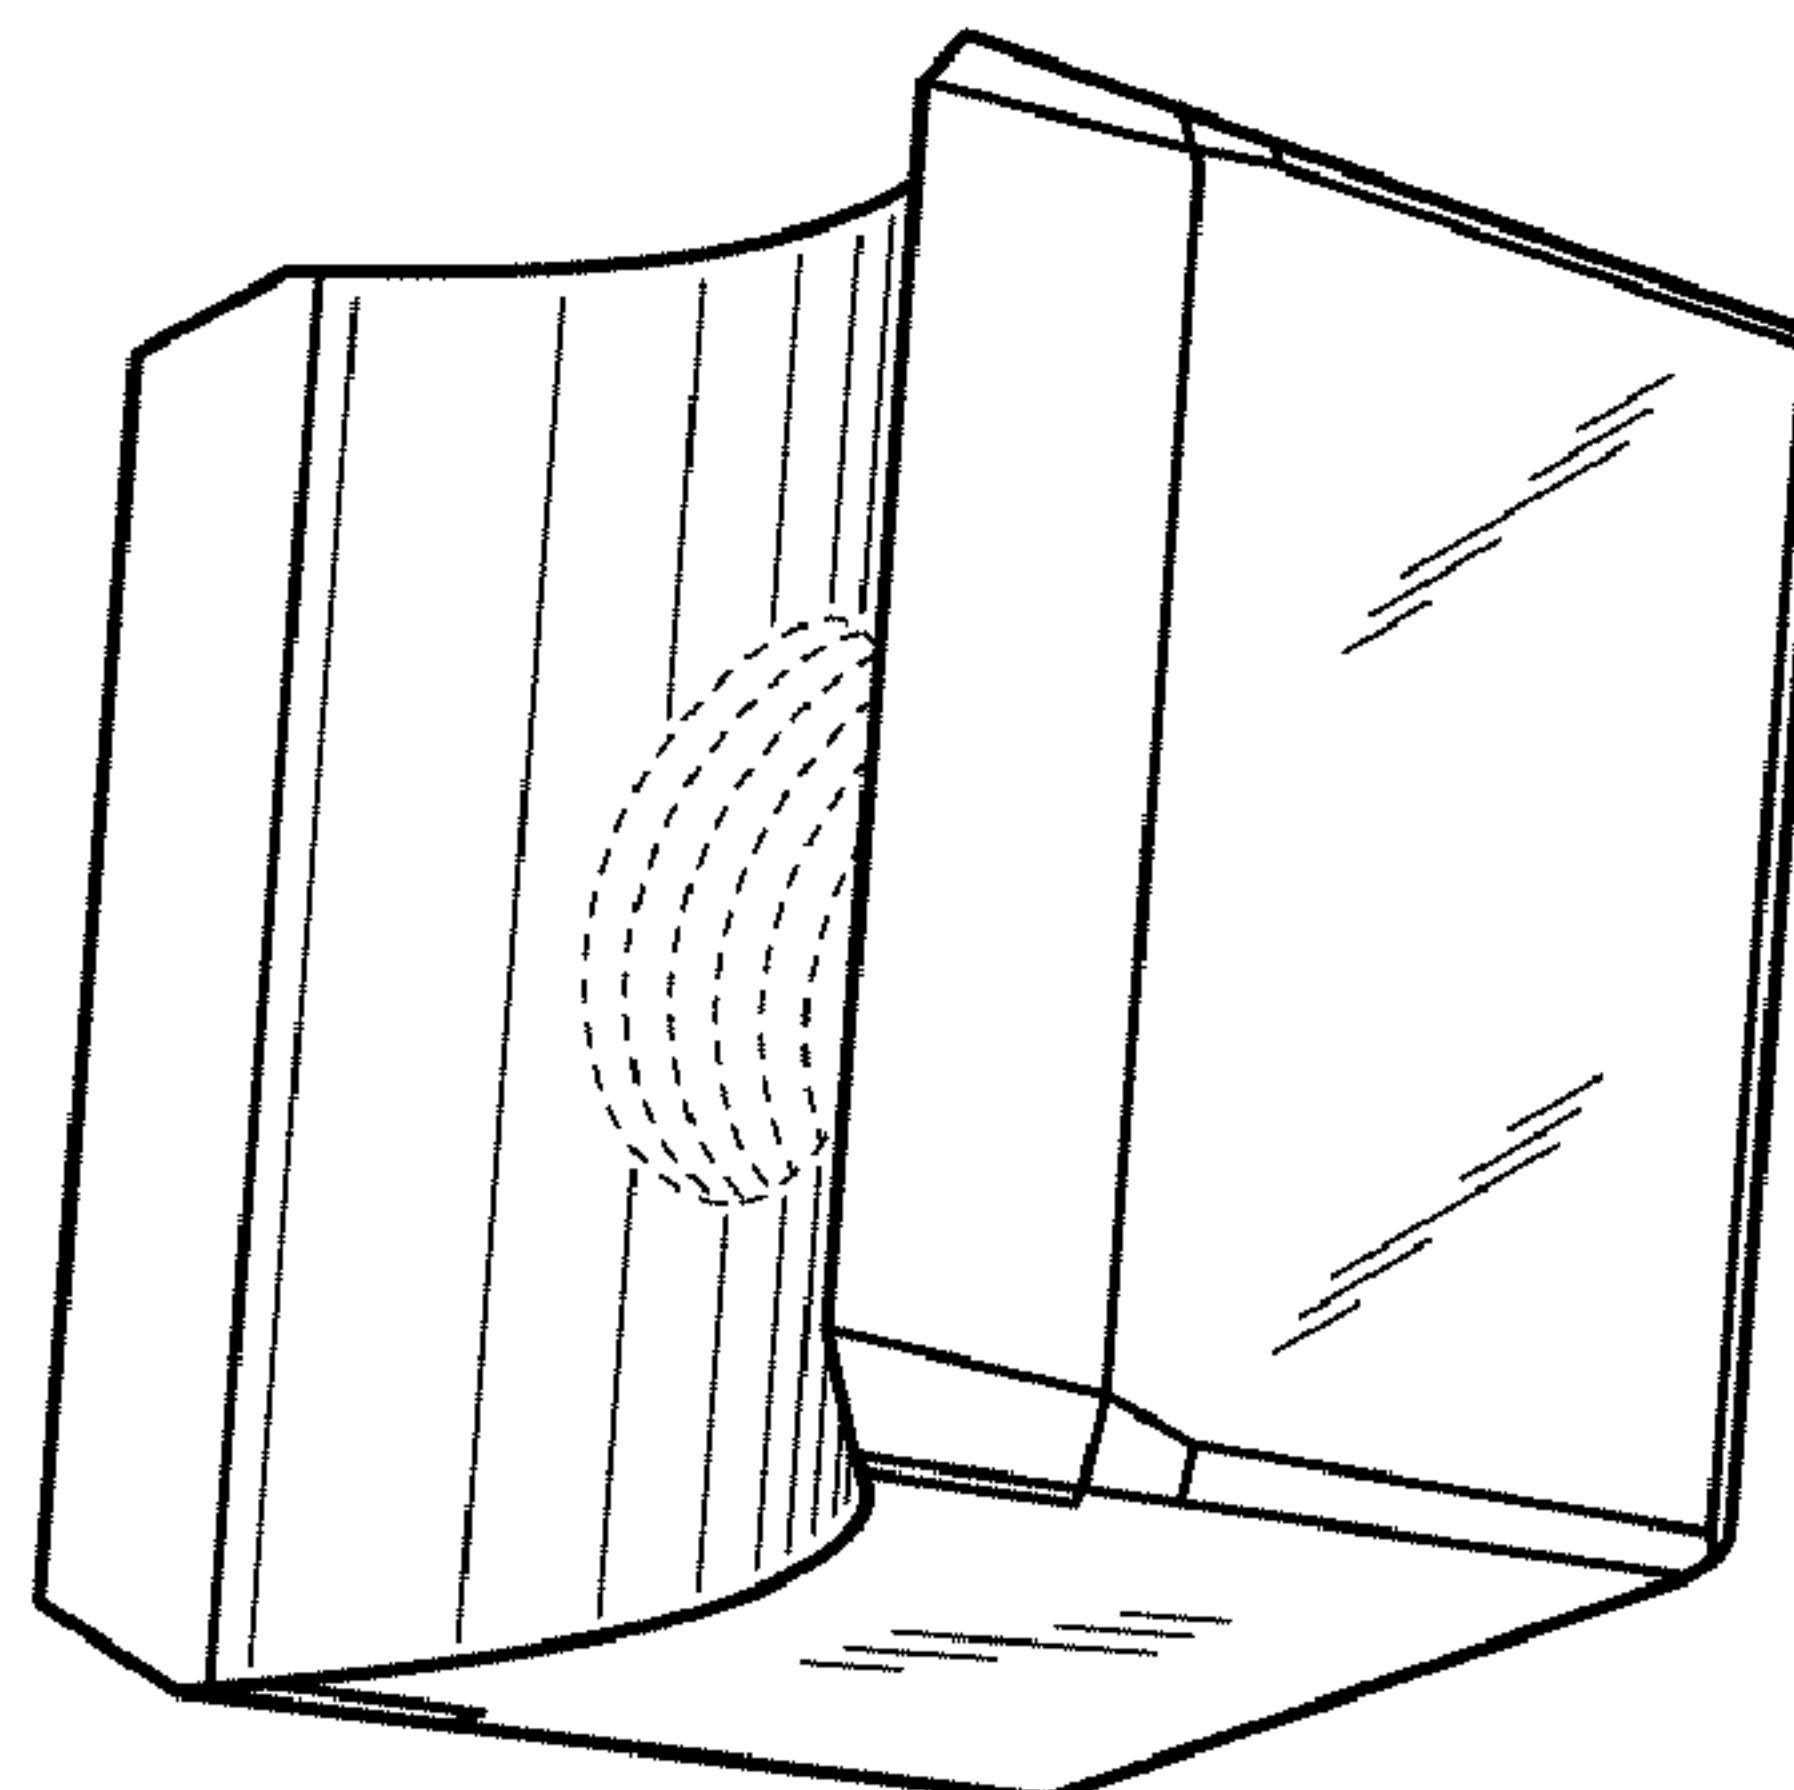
is a perspective view of a tooth for a circular saw or a mower drum according to a third embodiment of the present design;
